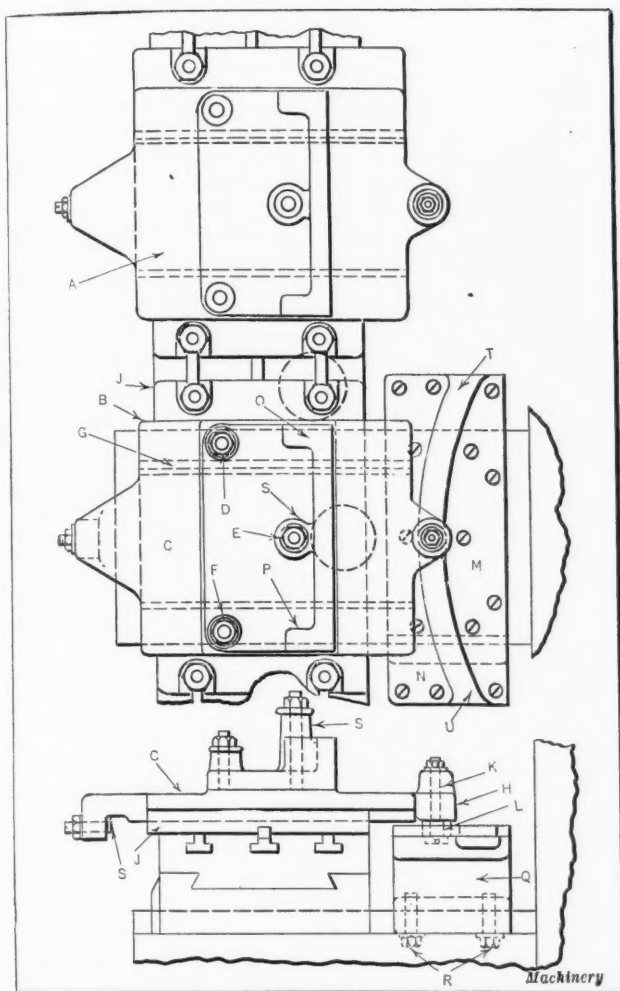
Fixtures for milling U-shaped Pad on Part shown in Fig. 1
